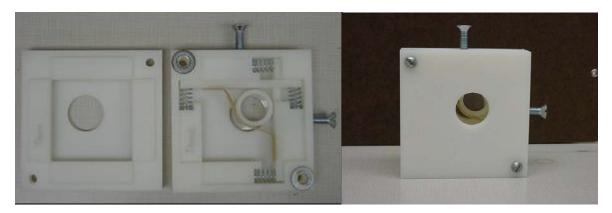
Alpha prototype design with major parts using rapid prototyped components.
